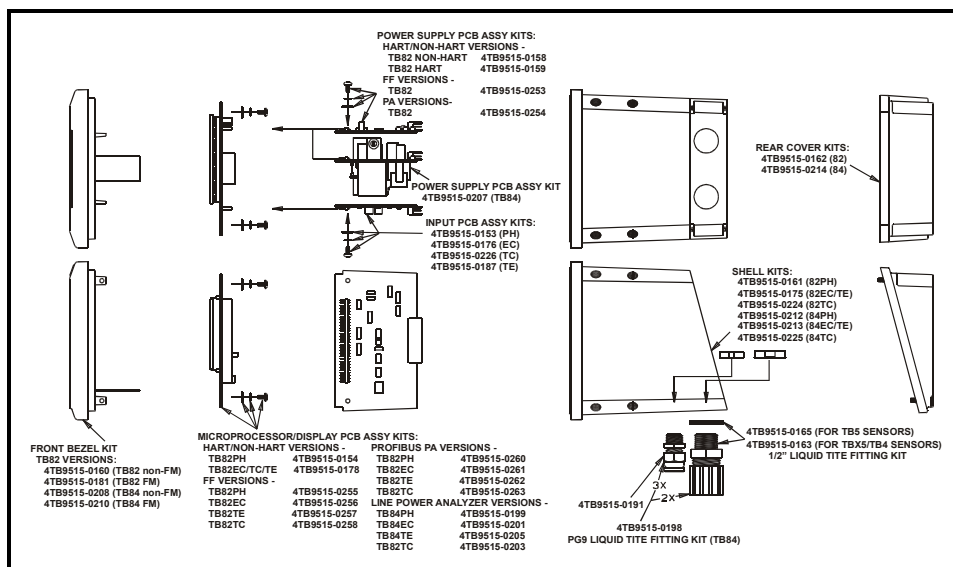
TB82PH PROFIBUS PA Transmitter Exploded View
